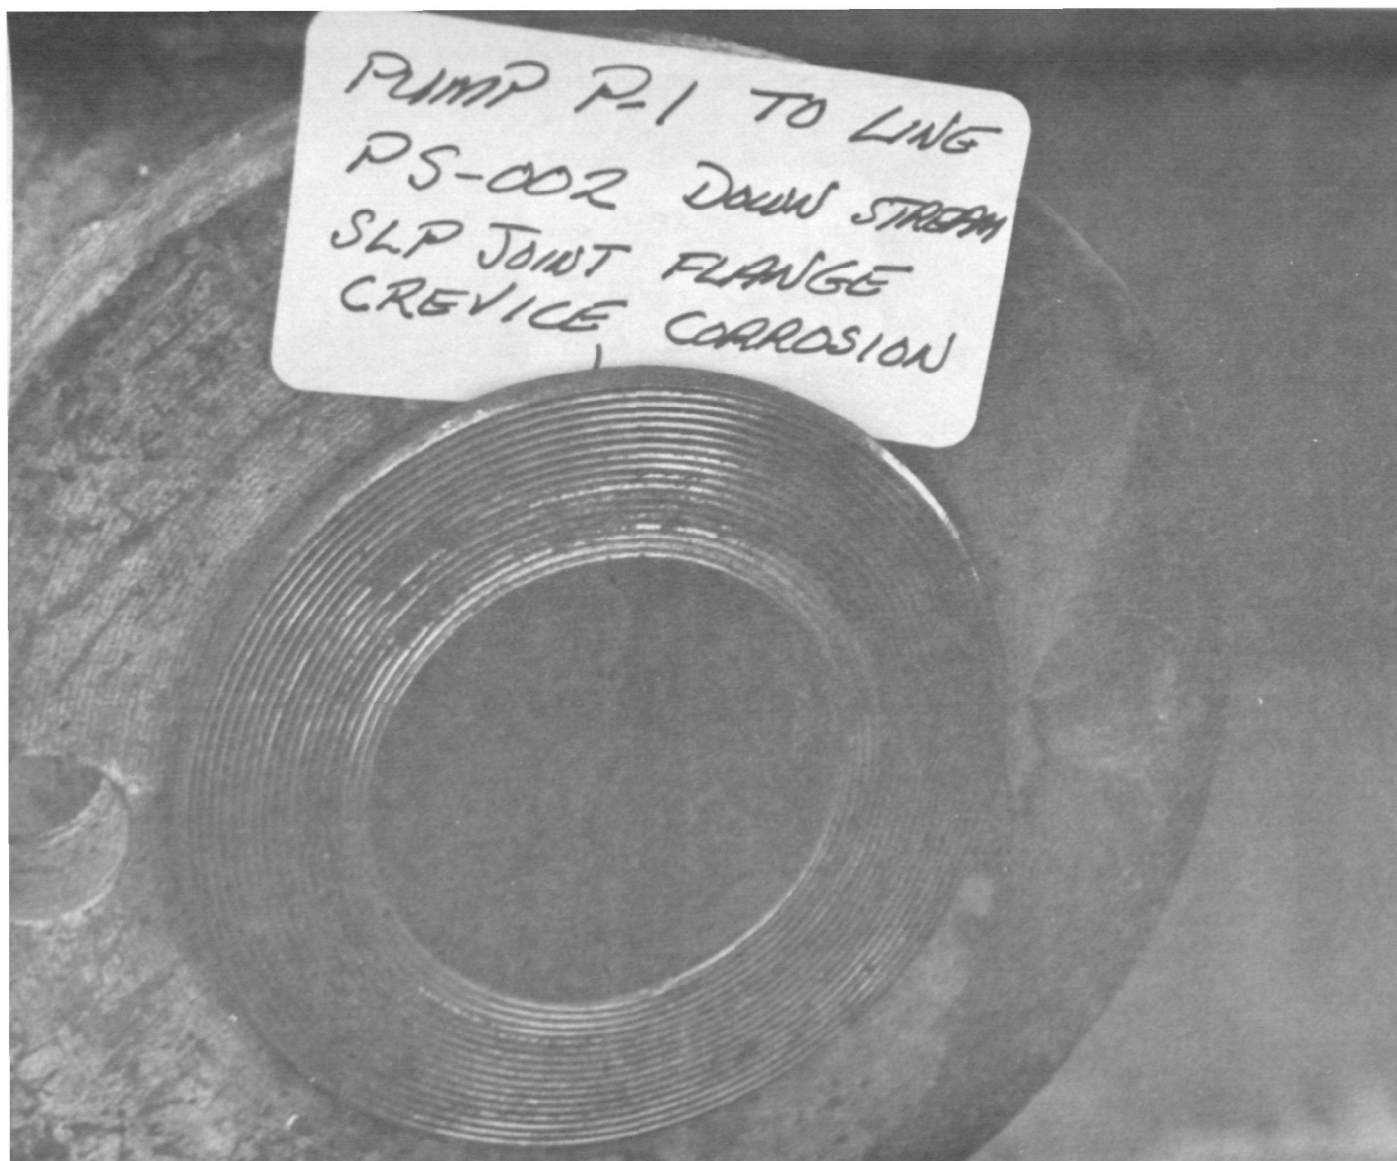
Flange Face on Outlet of Slurry Feed Pump P-1.
